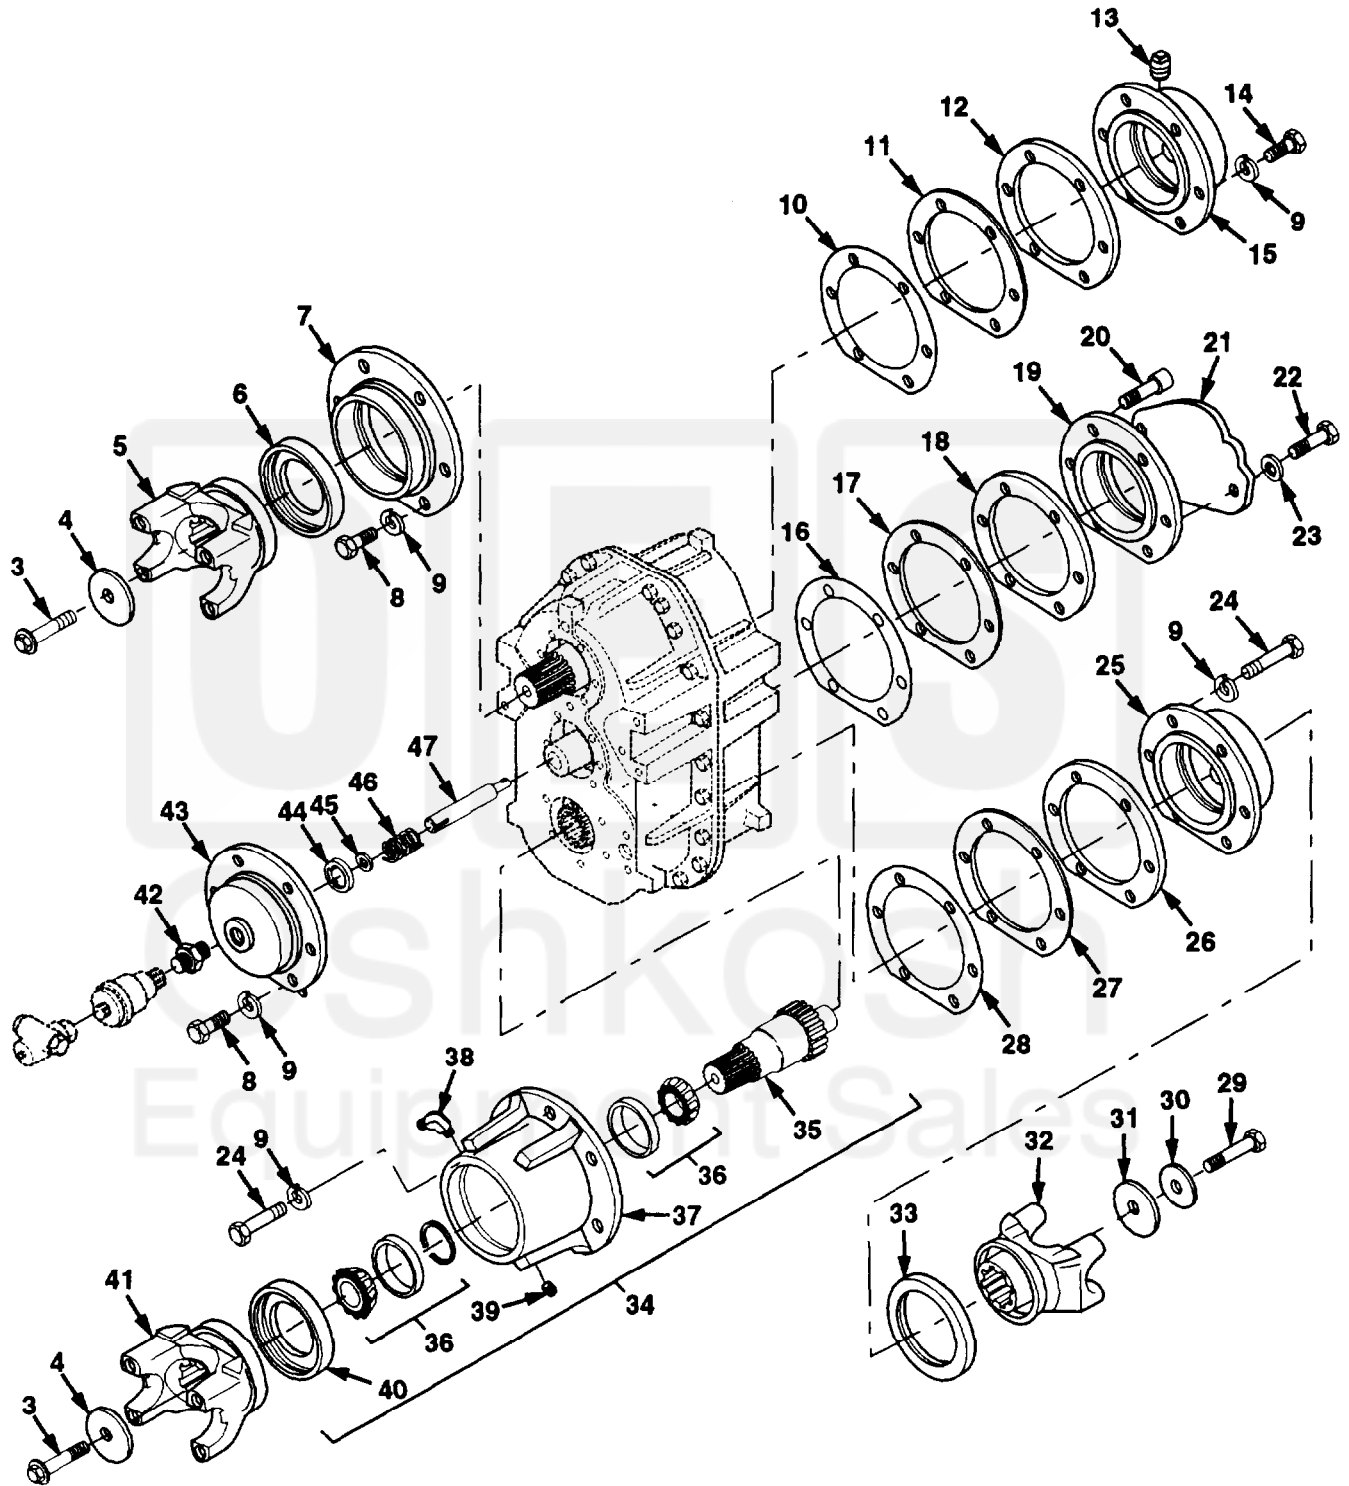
Transfer Case Assembly (Sheet 2 of 3)
